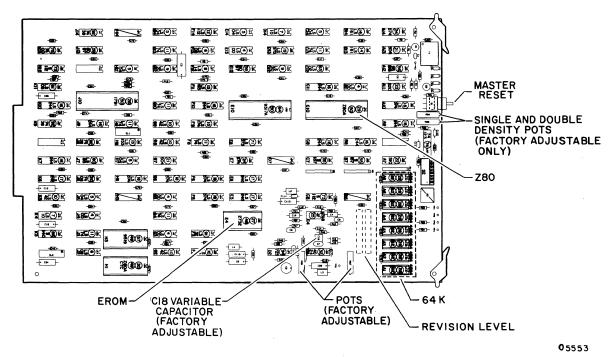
B-4.1. Controller Board Layout Model 9BED-4
